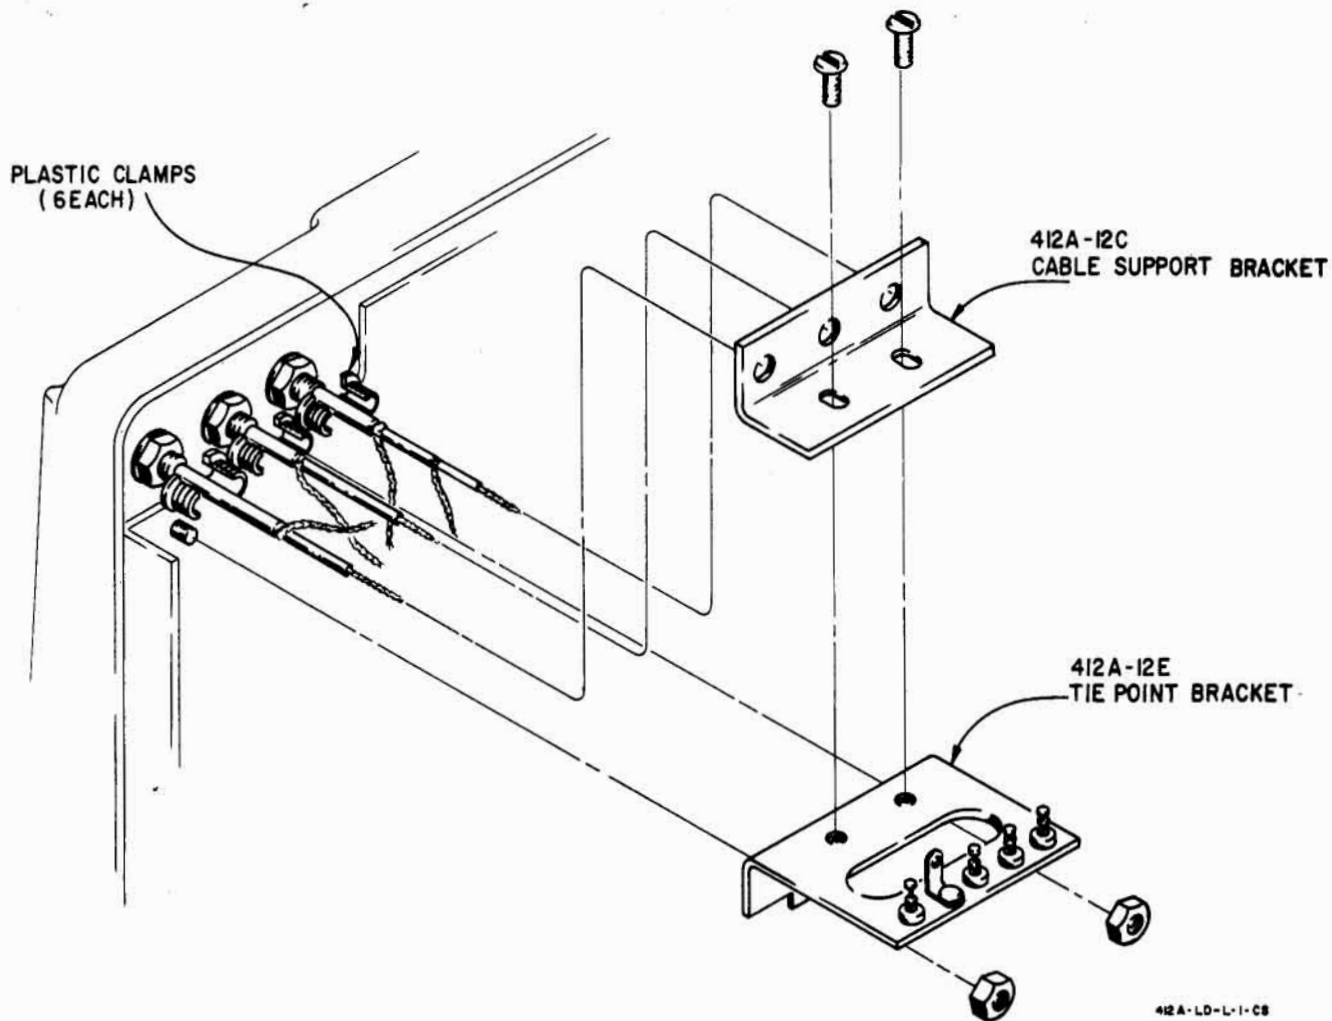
Exploded View of  $\text{Ⓢ}$  Model 412A Cable Support Assembly
